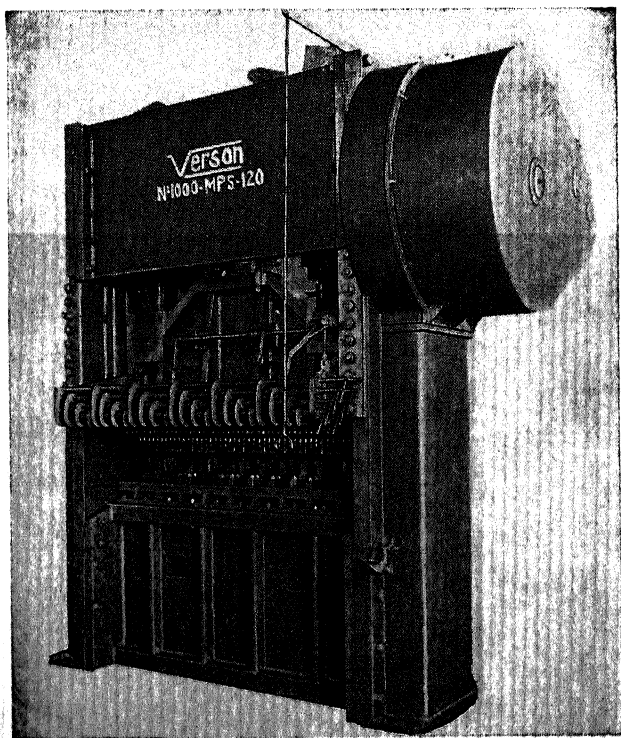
Multiple punch and shear, 1000-ton capacity, of arc welded steel construction. This machine is used in punching and shearing structural plate up to one-inch thickness.
